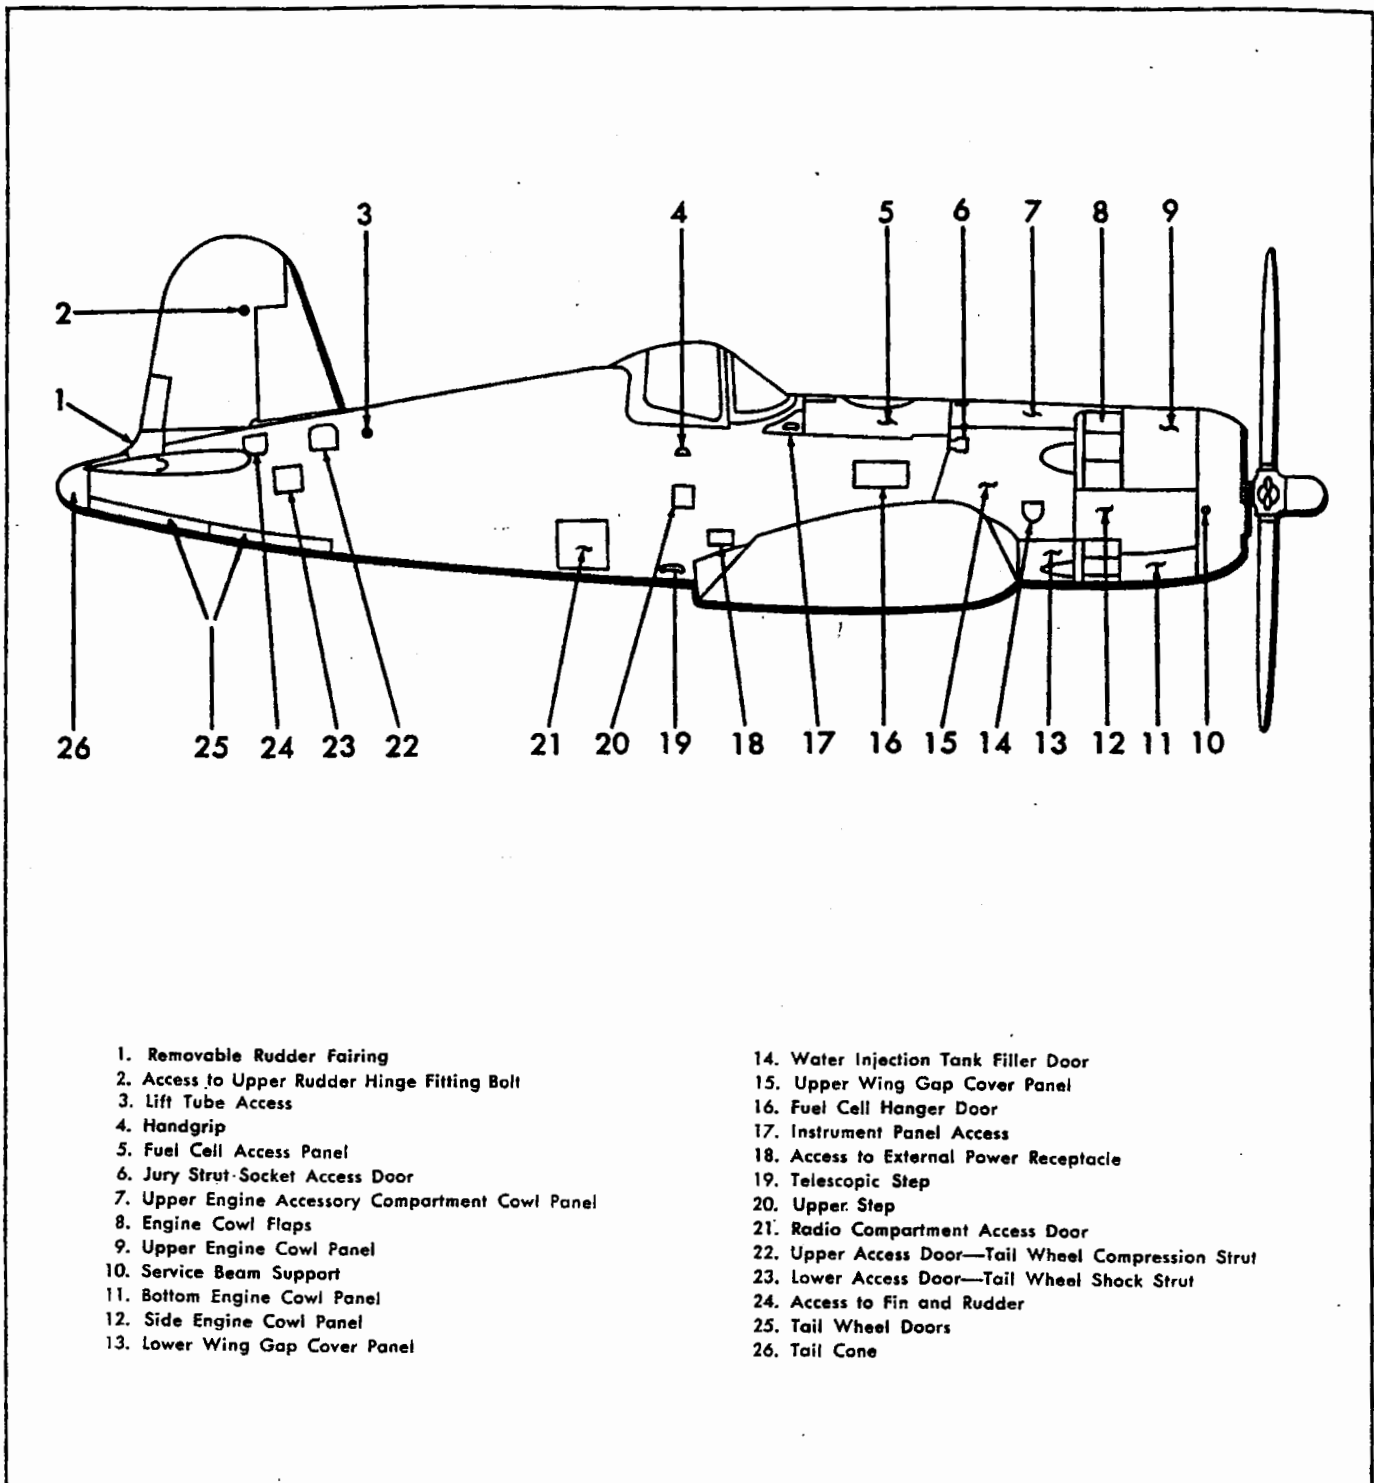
(Sheet 4 of 4 Sheets). Access and Inspection Provisions — Right Hand Side.
